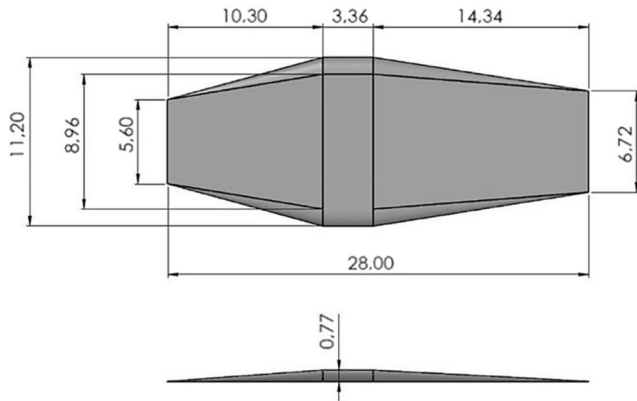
Geometry of a shock control bump with dimensions in millimeters.
